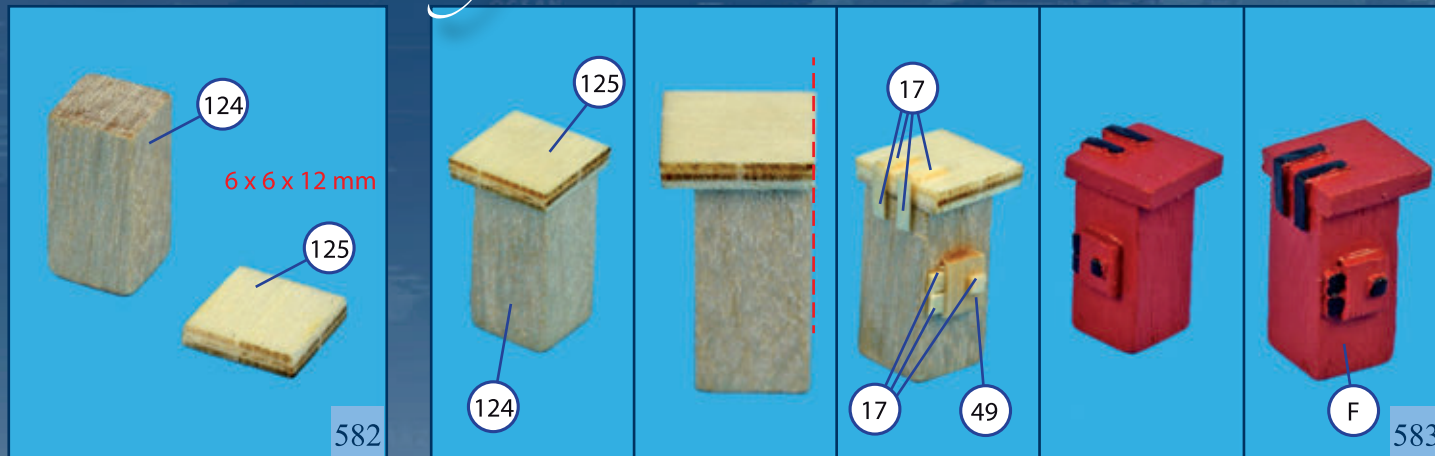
Add the details shown using remnants of lining 17 cut to 1.5 mm wide.
